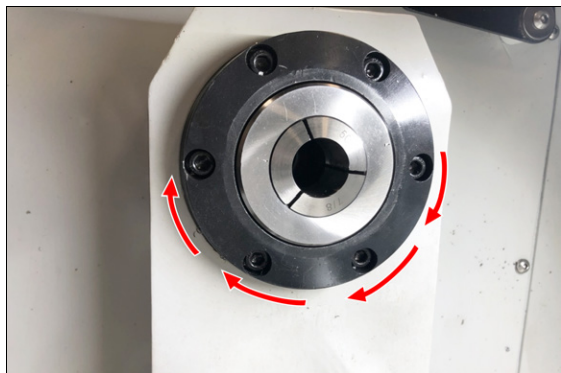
Spindle rotating clockwise, in the correct reverse direction.
